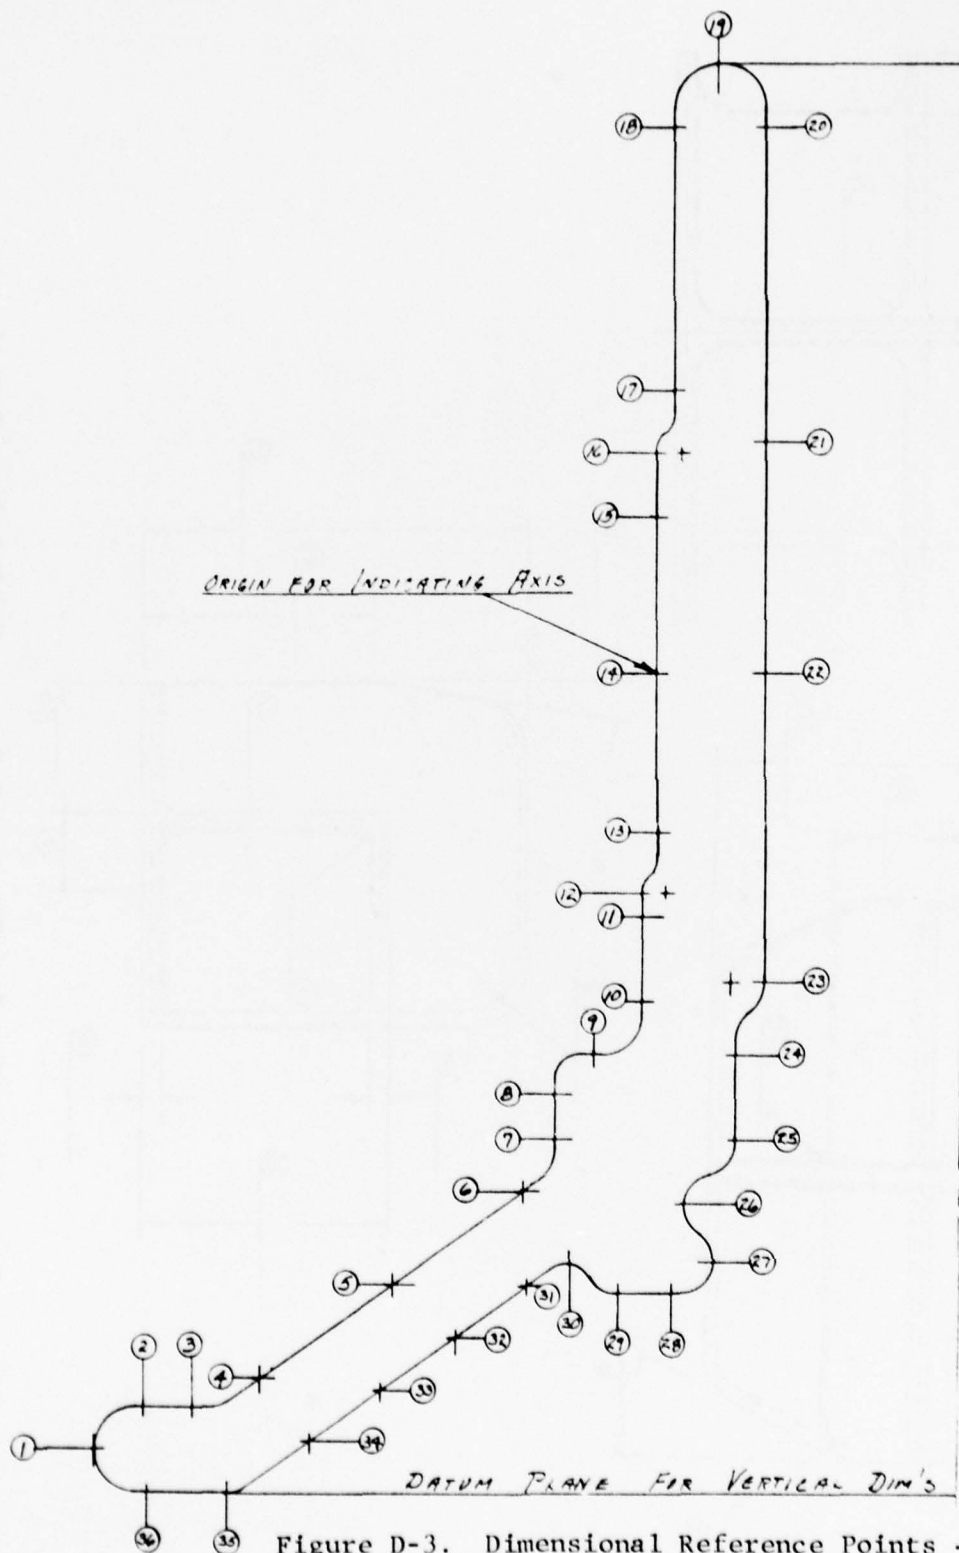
Dimensional Reference Points - Full-Size Stub Shaft.
